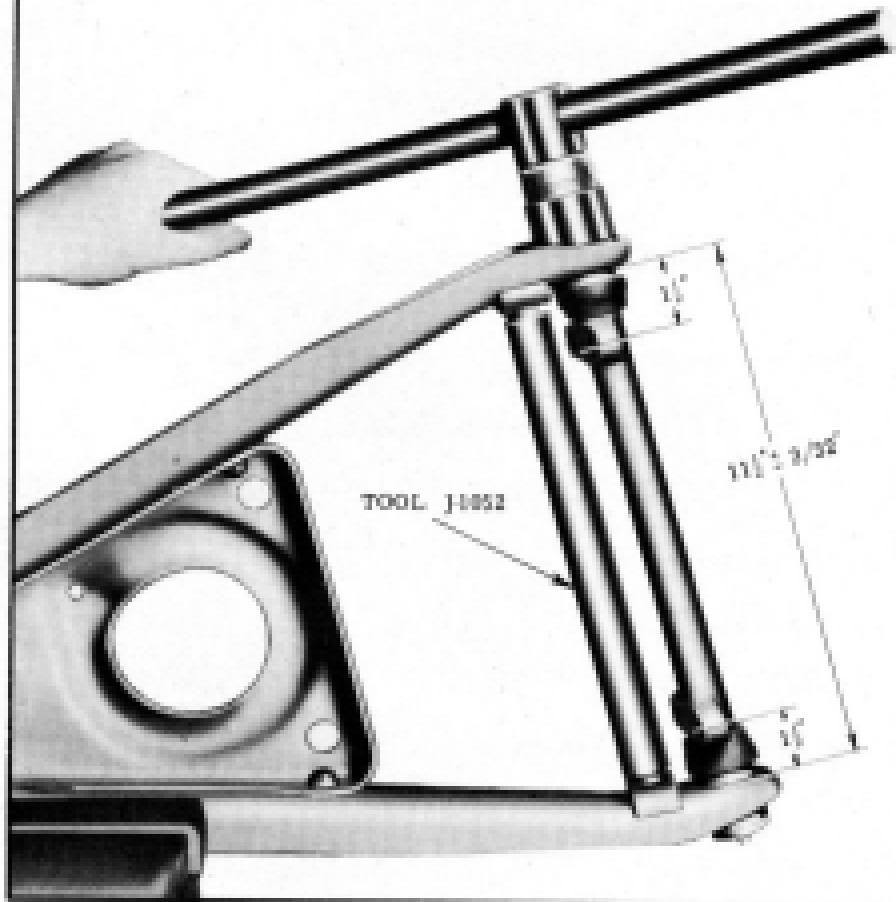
Insalling Pivot Shaft in Lower Control Arm Assembly
